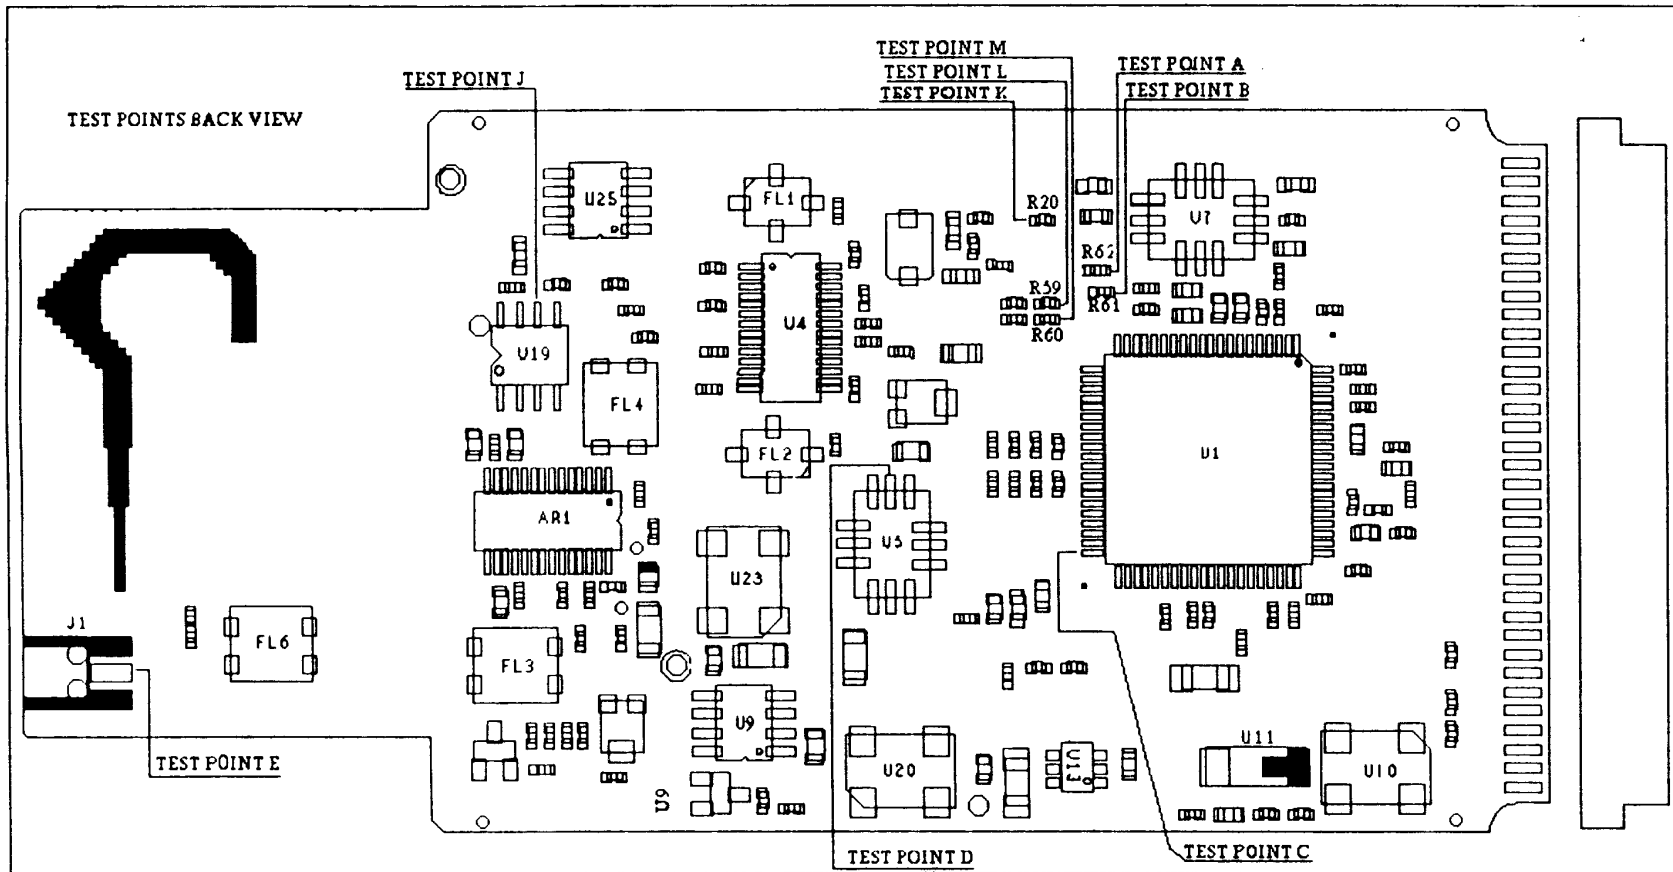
WIRELESS LAN PC CARD TEST POINTS (BACK VIEW)
